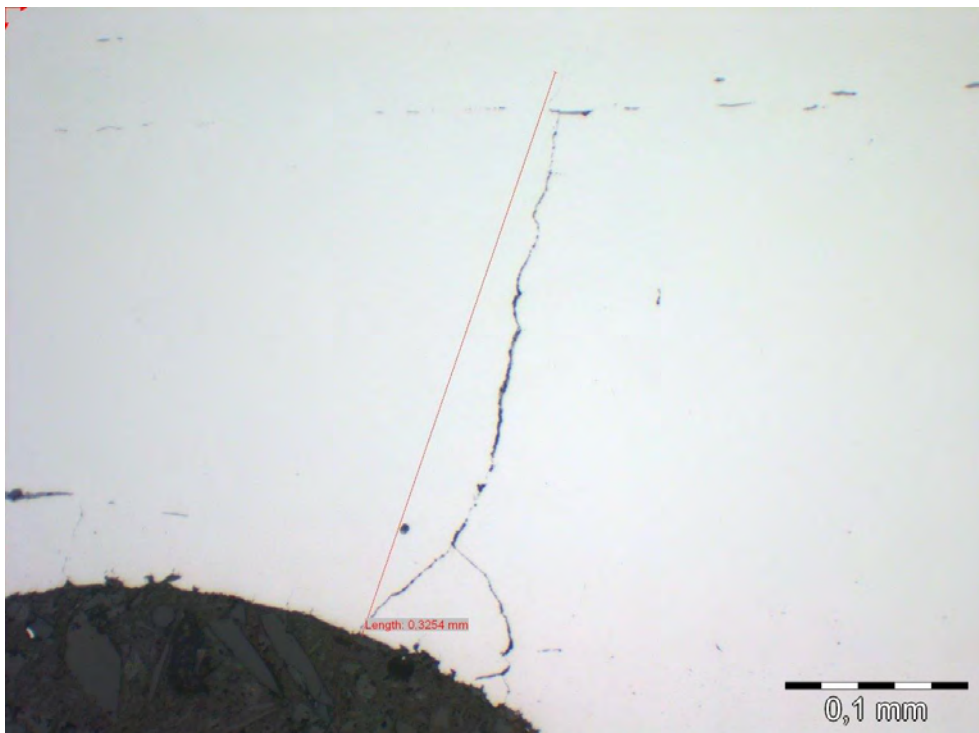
Crack at segment B, second ridge on barrel no. SFK 0123-A
